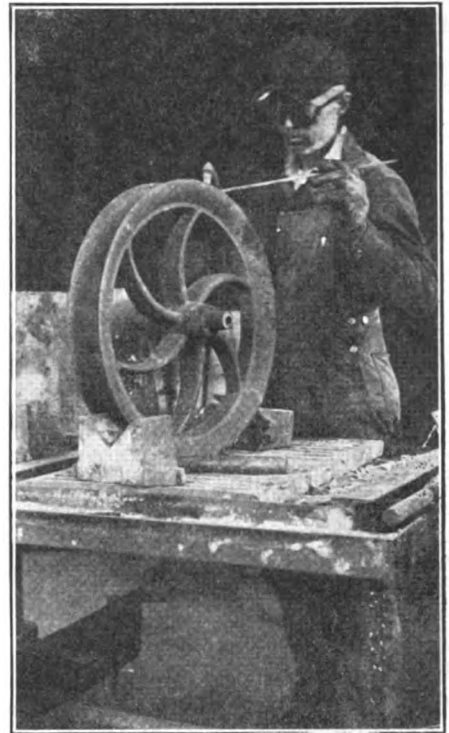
REMELTING THE INNER SIDE OF THE FRACTURE.
